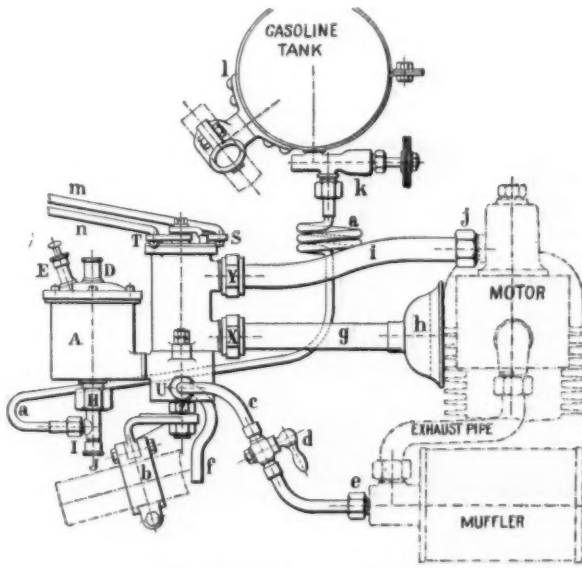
LONGUEMARE CARBURETER MOUNTED ON A MOTORCYCLE.
